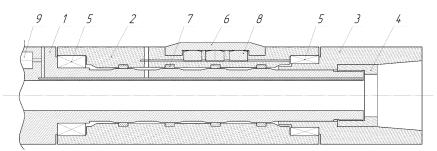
Hydraulic power transmission to geostationary BU: 1 –Rotary element of RSS; 2 – Geostationary element of RSS; 3 – Adaptor coupling; 4 – Lock nut; 5 – Radial and thrust bearings; 6 – Bias element; 7 – Radial seals; 8 – Pistons; 9 – Actuator
